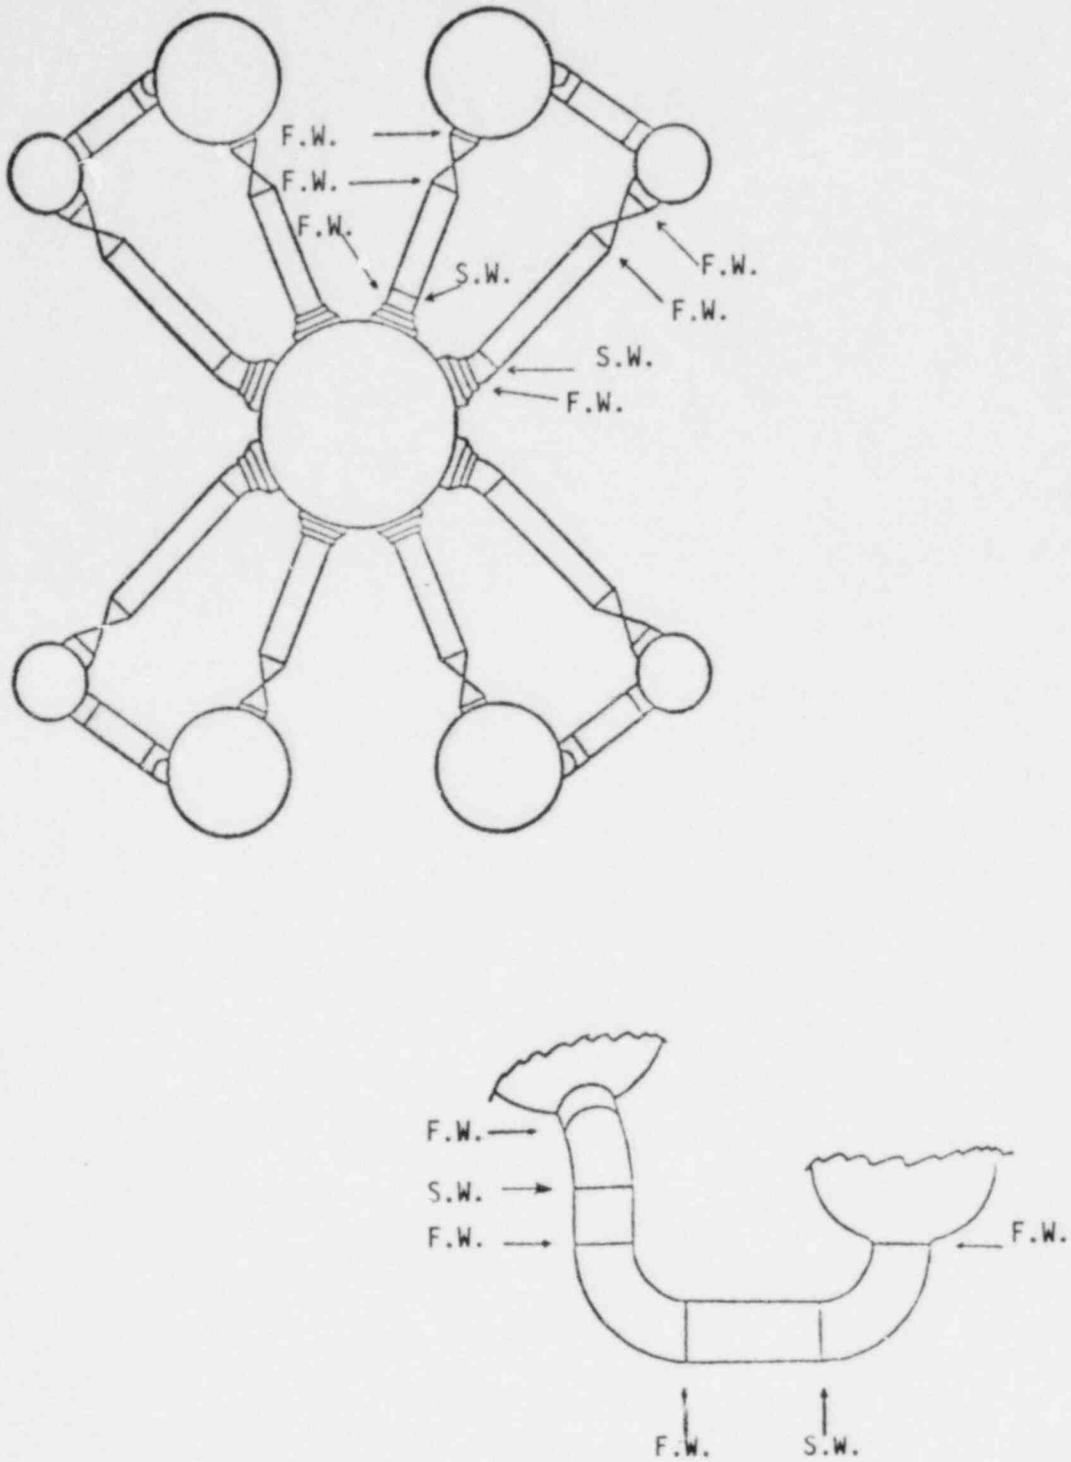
Weld location for Yankee Rowe Unit
